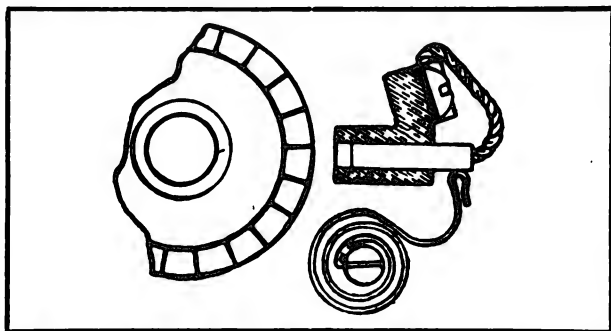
, Holding in Raised Position by Means of Spring While Disassembling the Motor or Generator.
